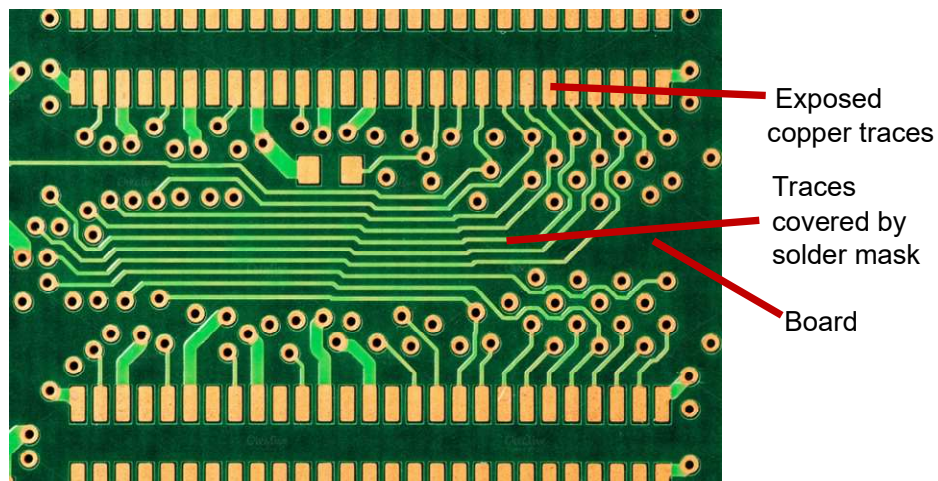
Real-life PCB. Image adapted from TechDiggersBlog.com.
